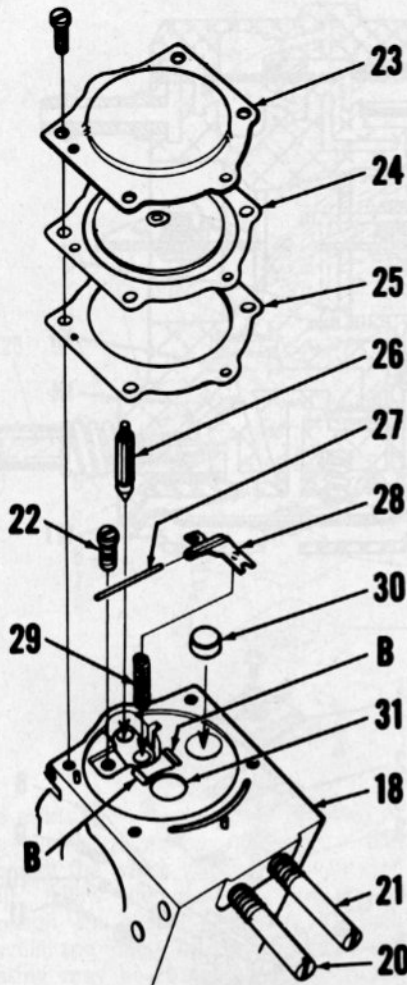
Exploded view of metering diaphragm assembly used on Walbro Model SDC. Refer to Fig. S21 for other carburetor components.
